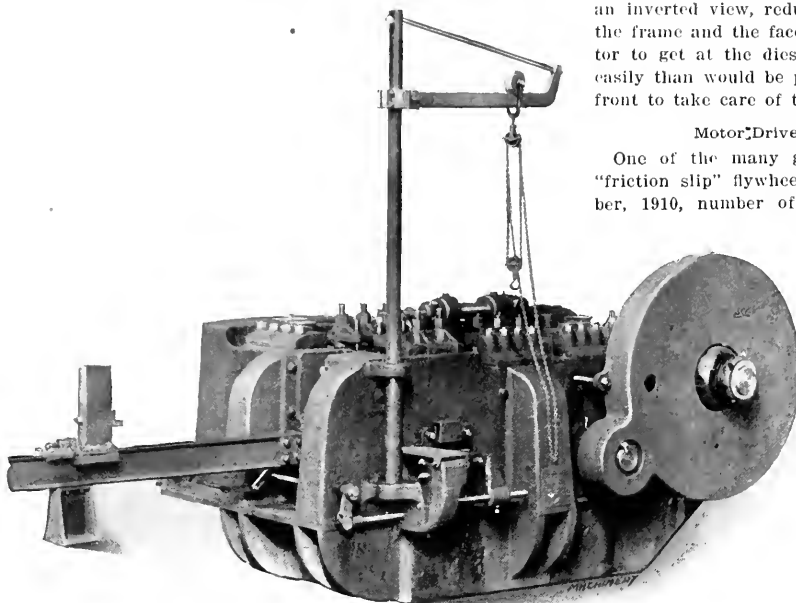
"National" Four-inch Heavy-pattern Forging Machine
